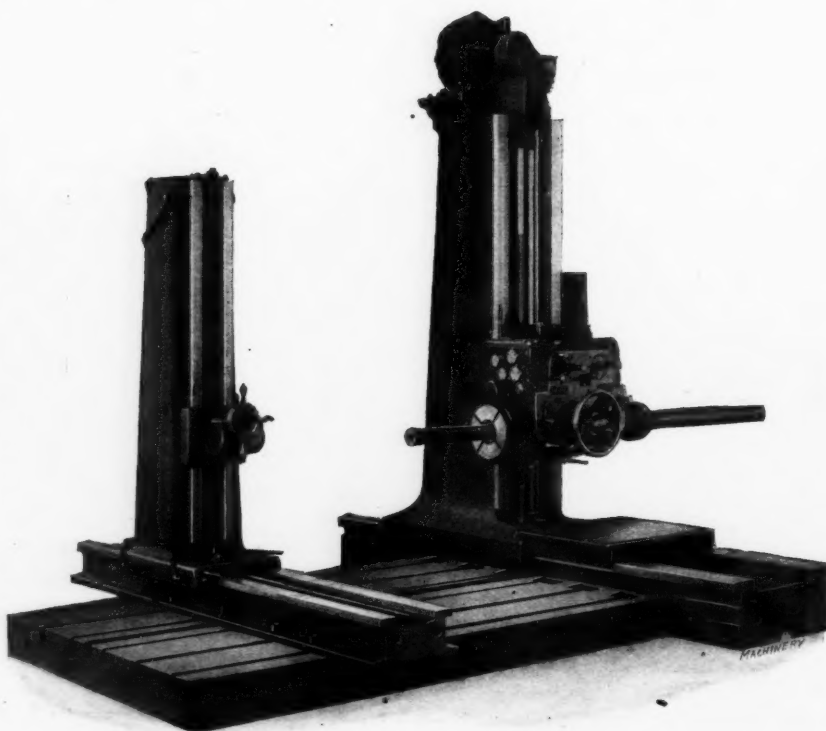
Landis Floor Type of Horizontal Boring, Milling and Drilling Machine
